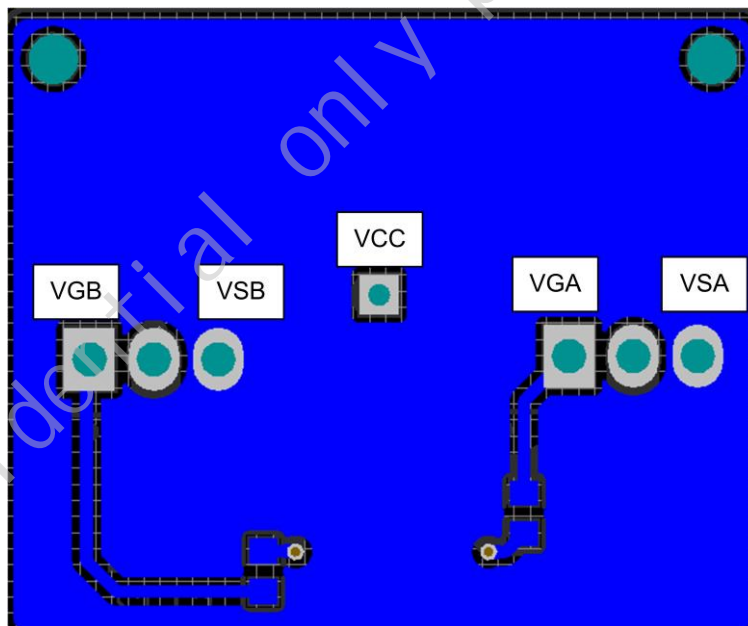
MK1626 Demo Board Layout (Bottom Layer)
